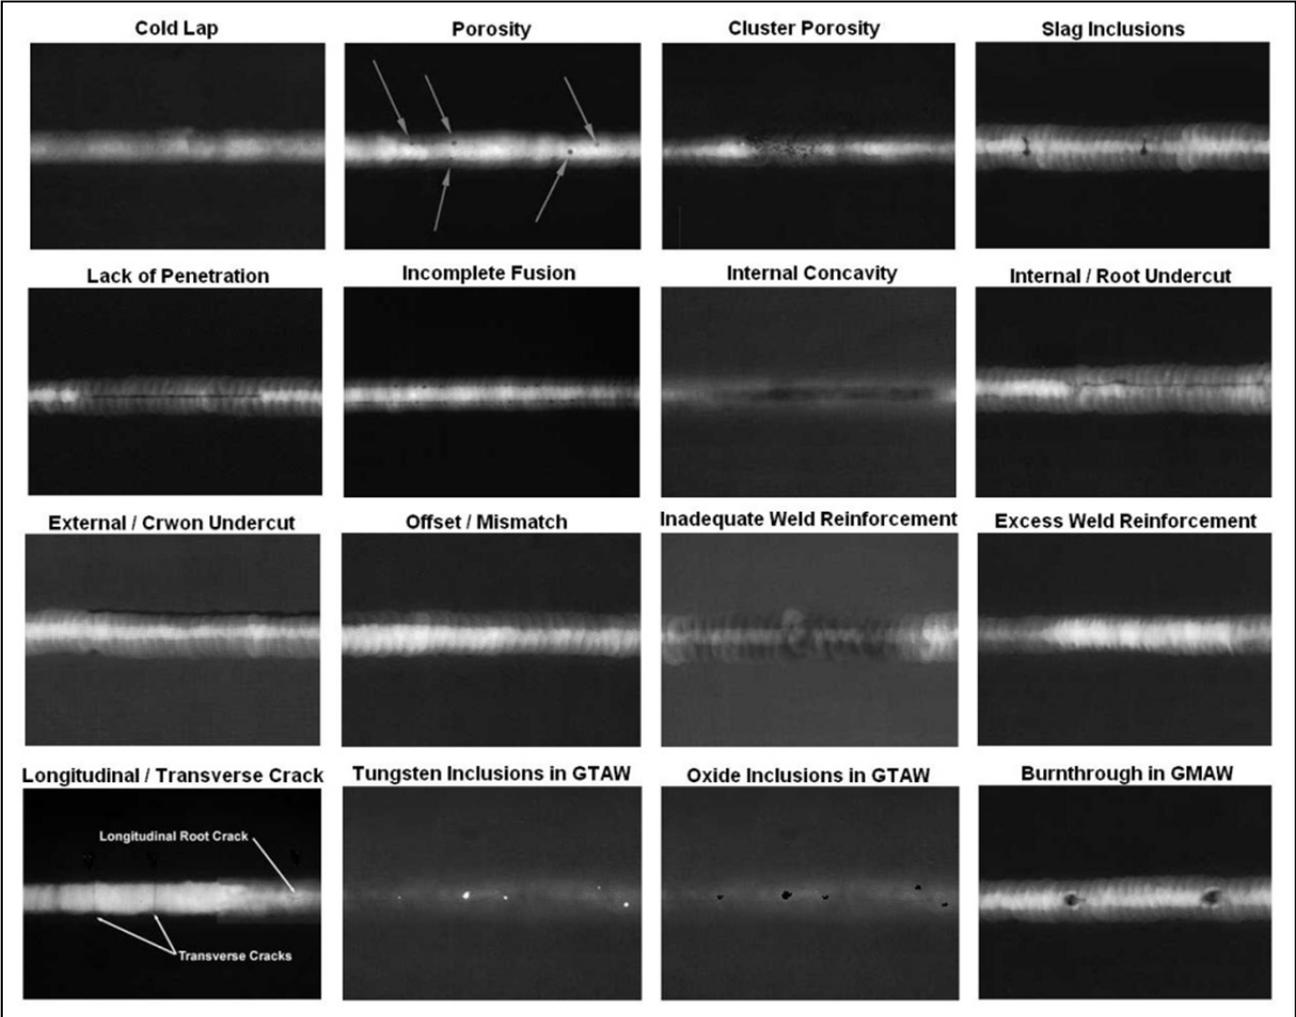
Some weld defects as they appear on radiographs [WS67]
